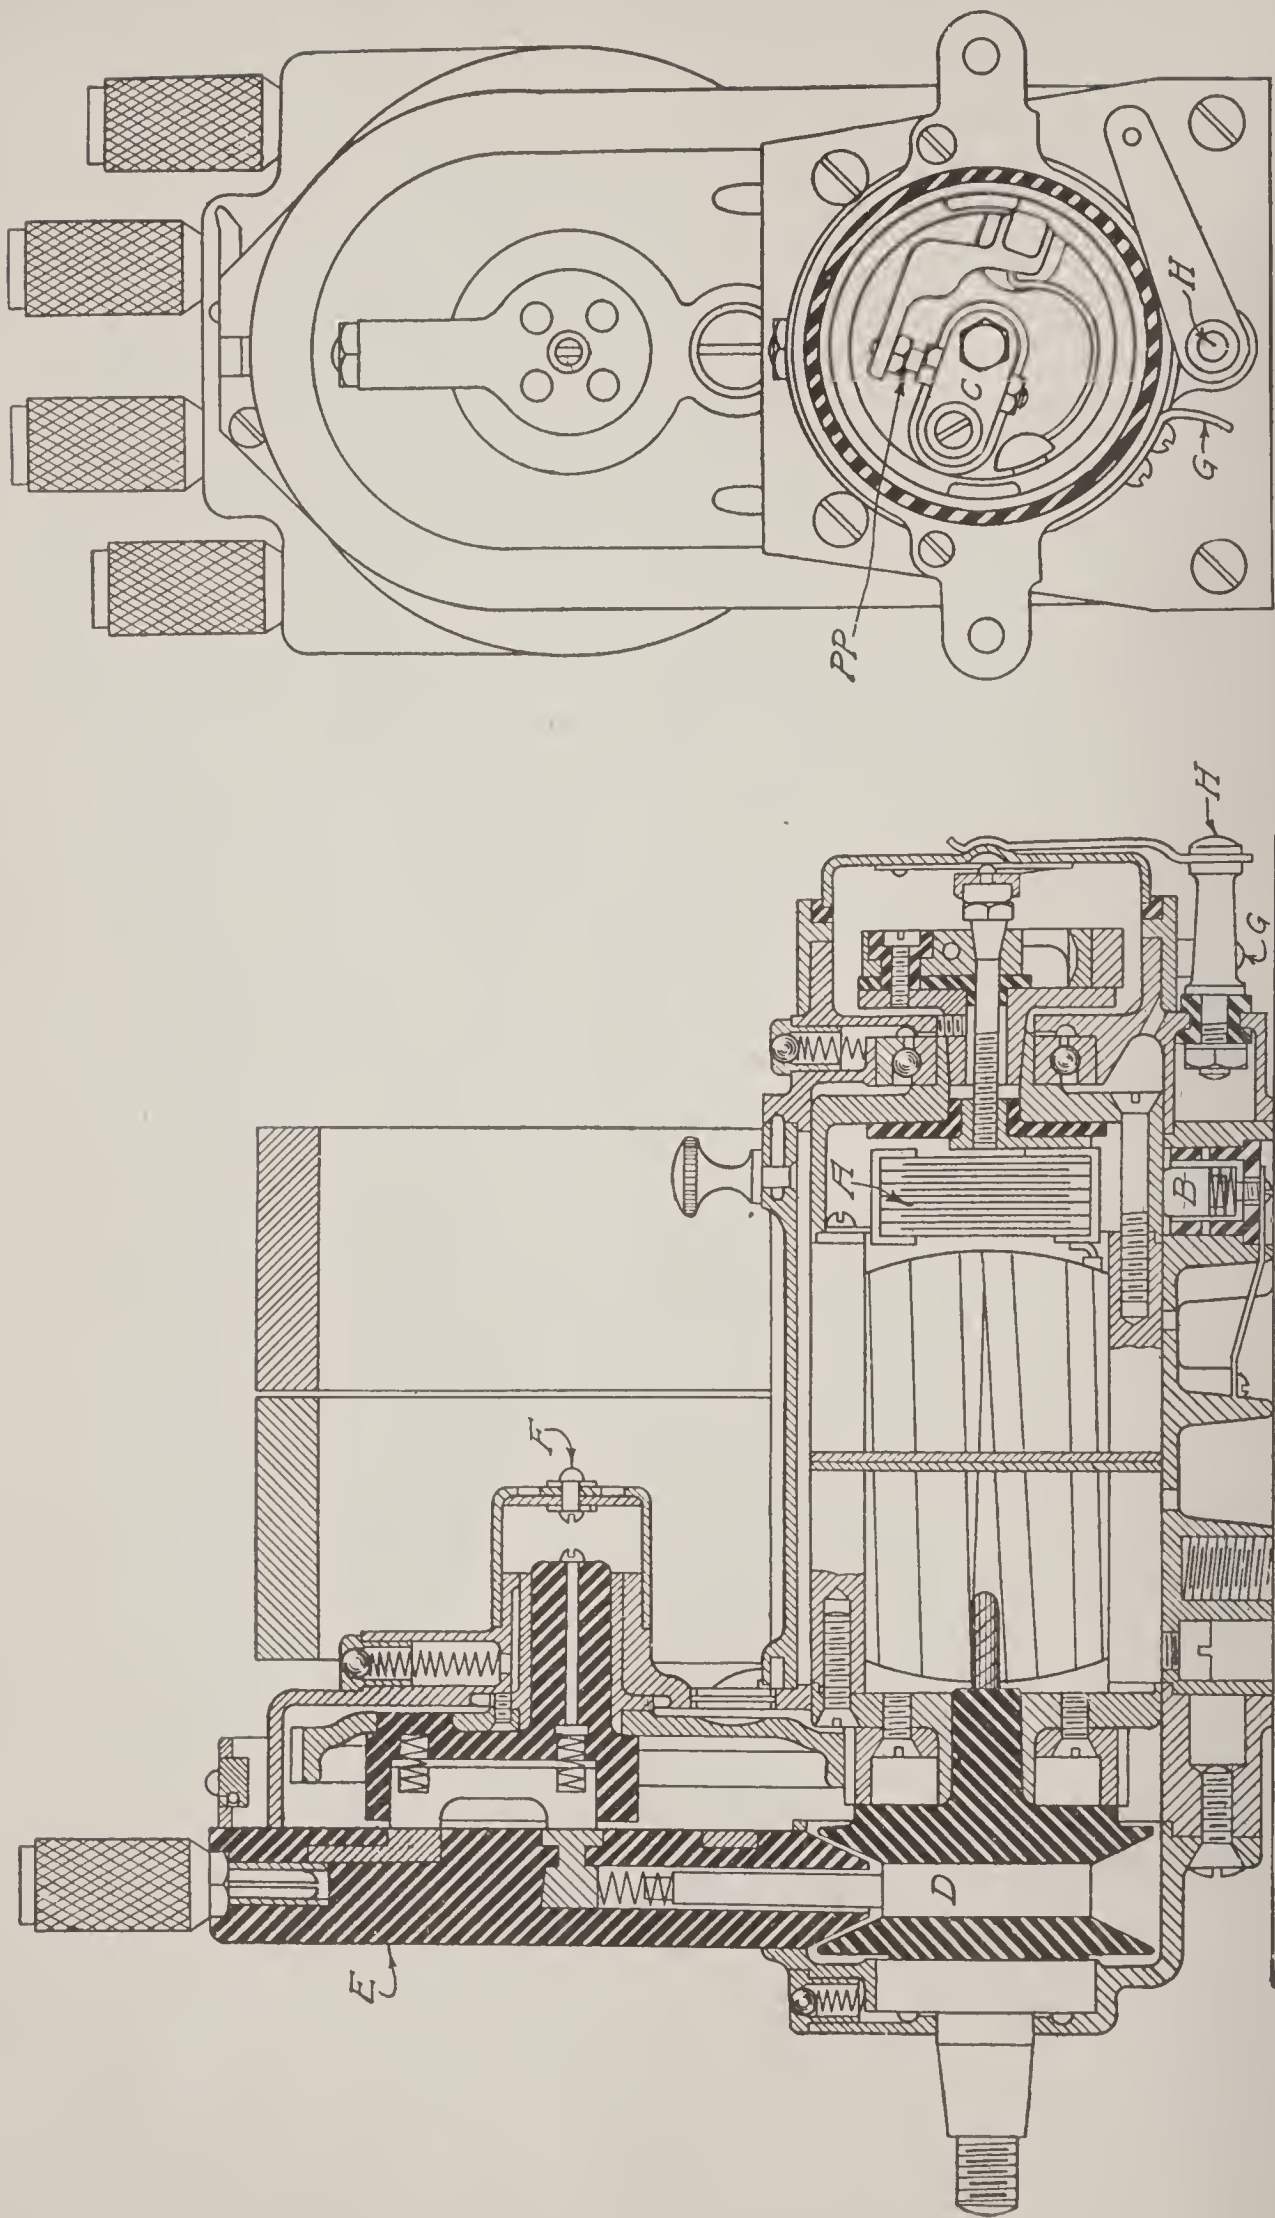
Sectional and End Views Through High-Tension Magneto (Horseless Age)
